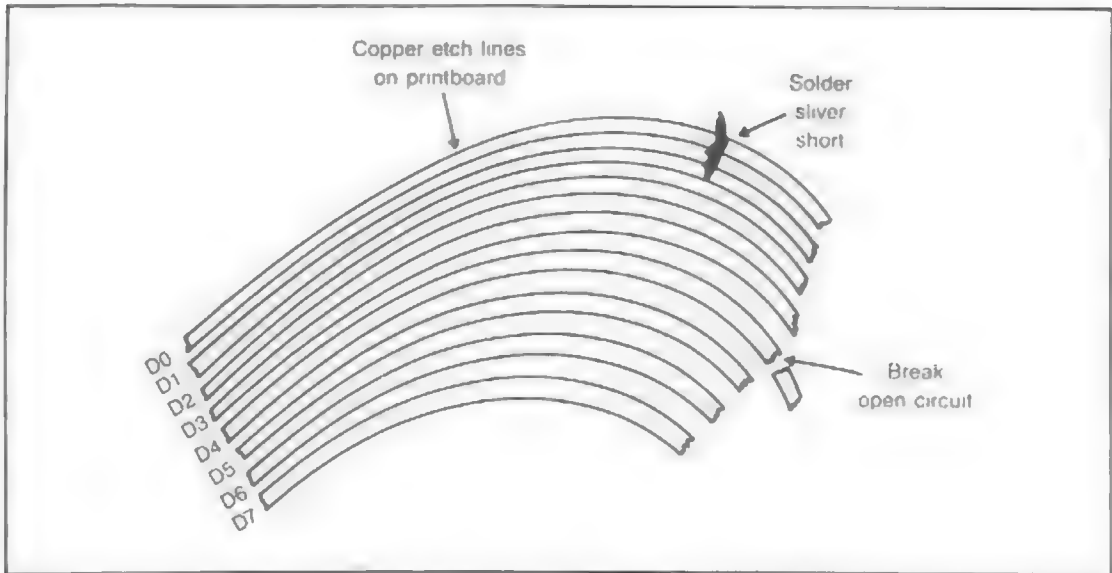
If a sliver of solder should fall across wiring strips it will cause a short circuit. Should a copper etch track break it could be an open circuit.
